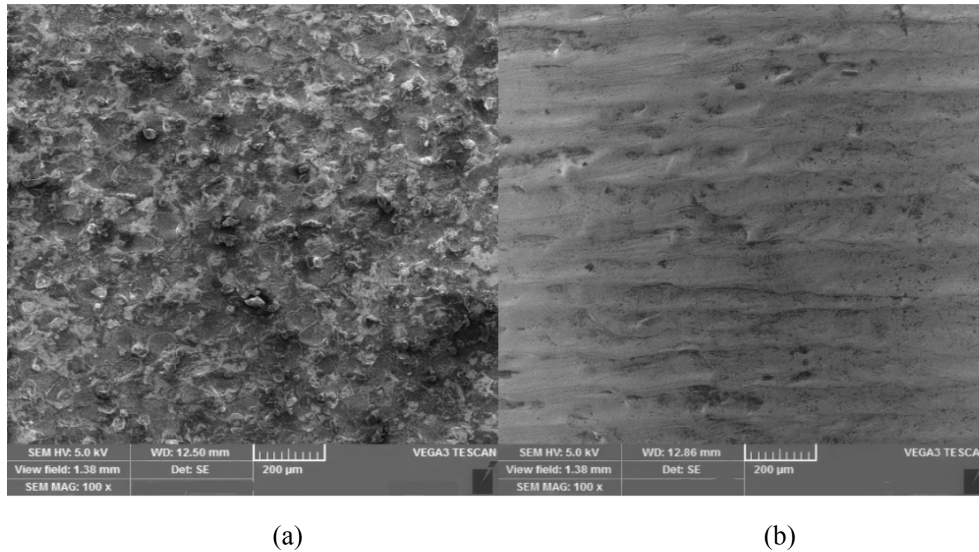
| SEM image of AISI 316L cut surface (a) EDM wire cut and (b) laser cut for 2.0 mm thick sheet.
